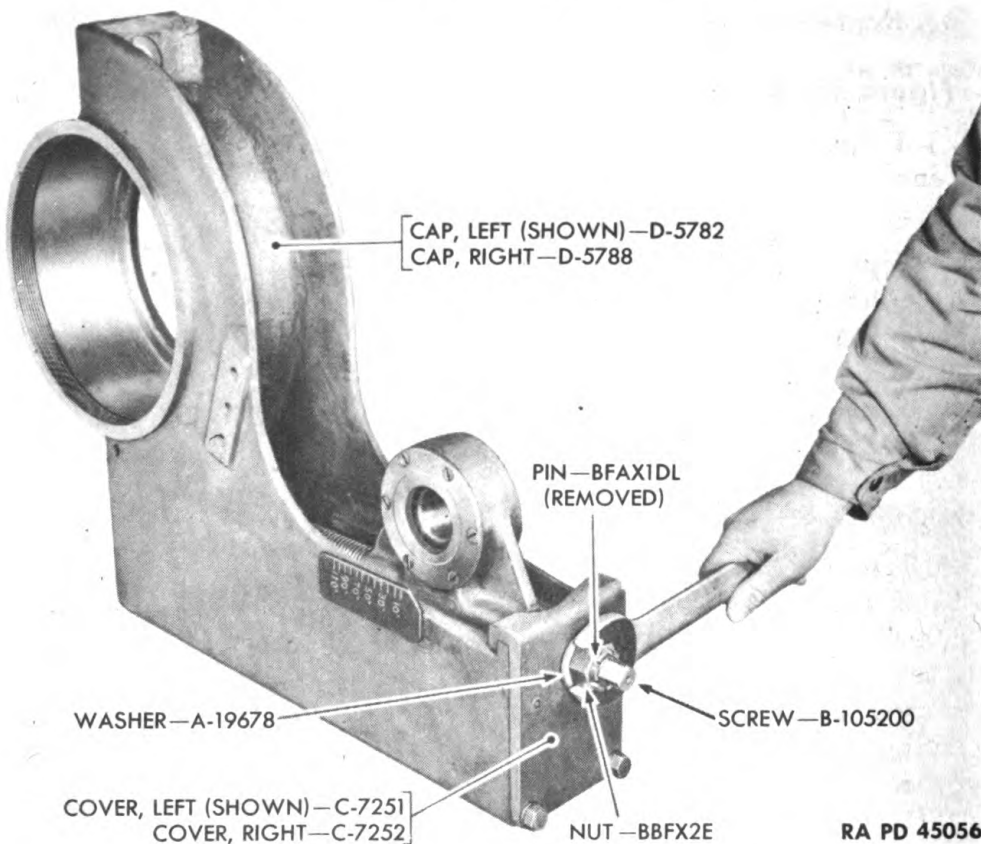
Removing Equilibrator Guide Adjusting Screw Nut
